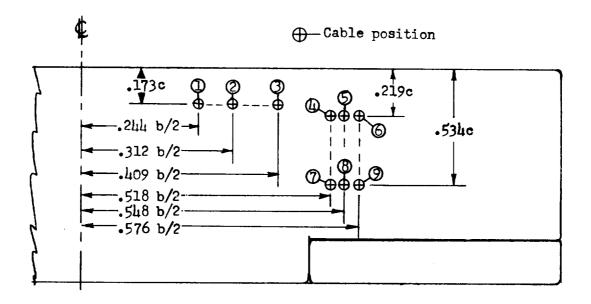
Guy-cable attachment on wing lower surface. View is from above right-hand wing.
